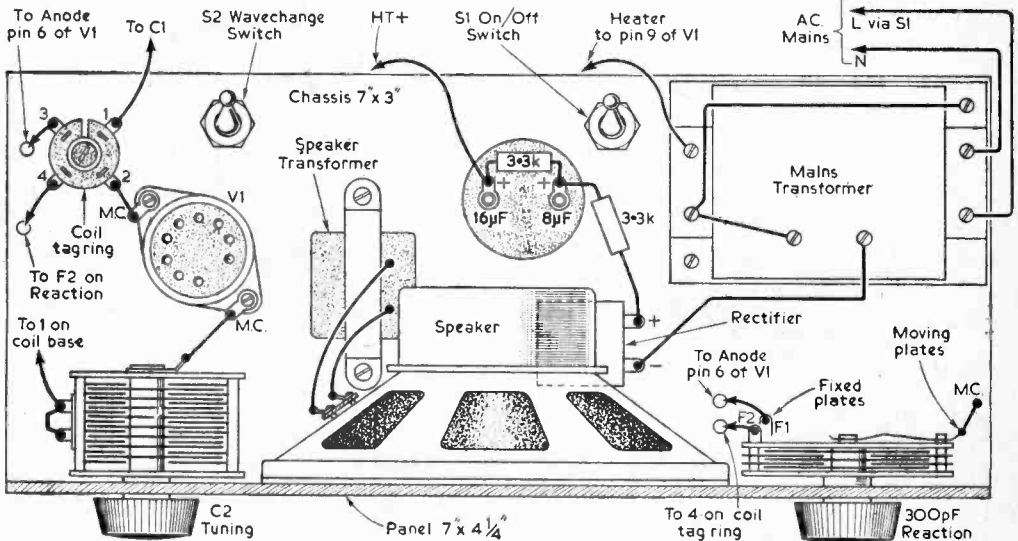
Layout, and dimensions, of the chassis and front panel.
